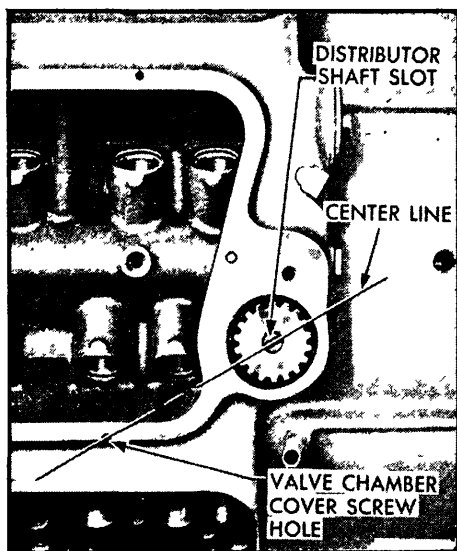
B 1951-52 Chrysler and De Soto V8. Locating slot in oil pump drive shaft for distributor installation
